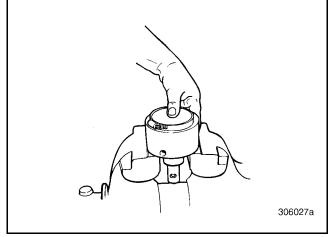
Piston Assembly Installed in Cylinder Housing Bore
